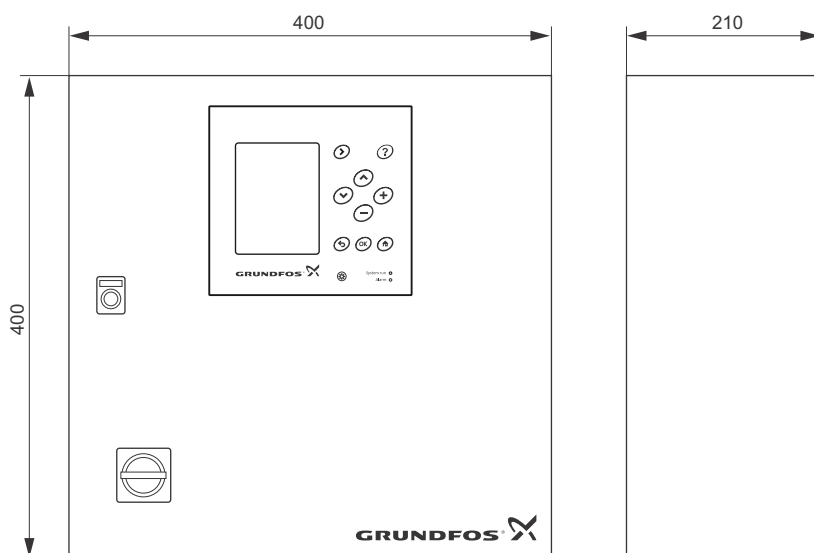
Dimensional sketch of control cabinet with optional IO 351B module installed inside
